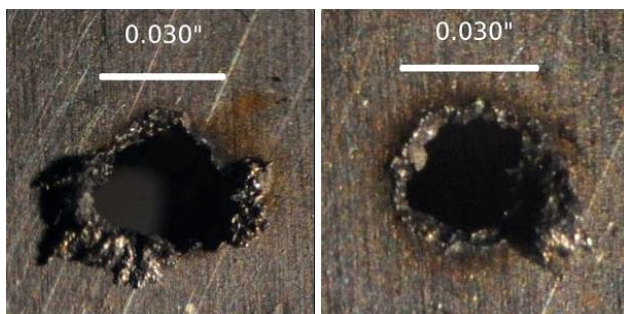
Successful hole drilling through 0.050" Inconel 718.
